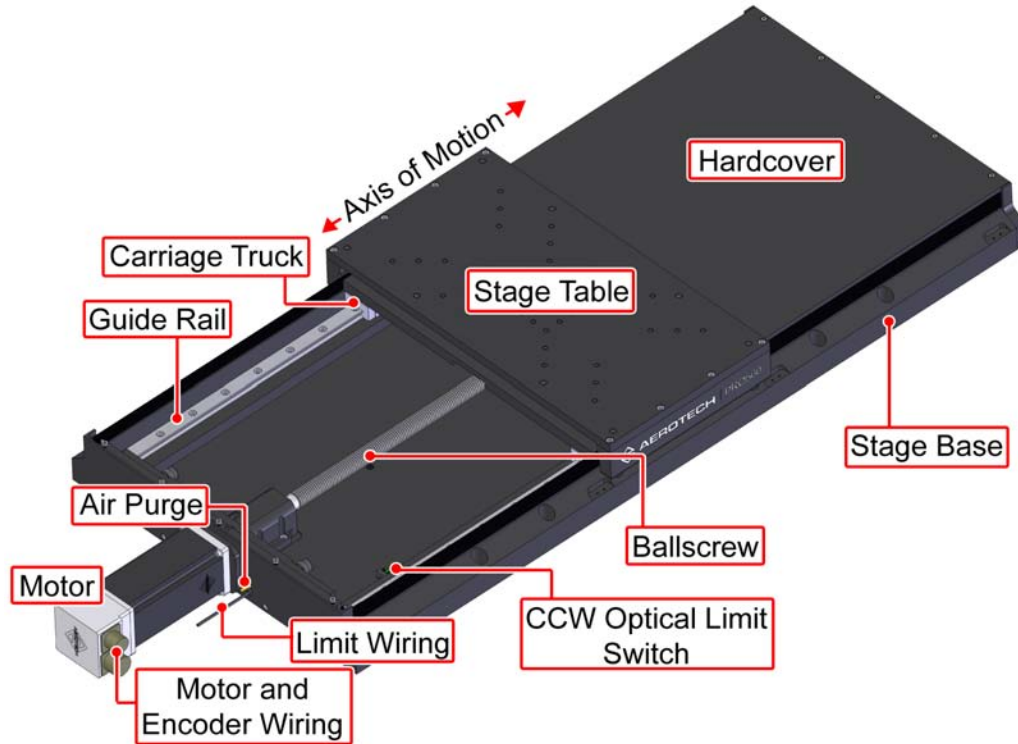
PRO560 with Cutaway View of Ballscrew
